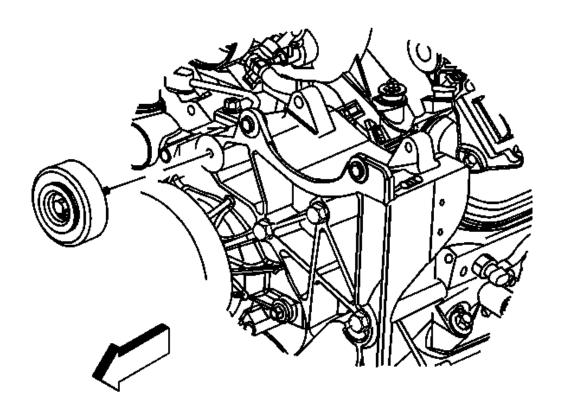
View Of Drive Belt Idler Pulley Courtesy of GENERAL MOTORS CORP.
